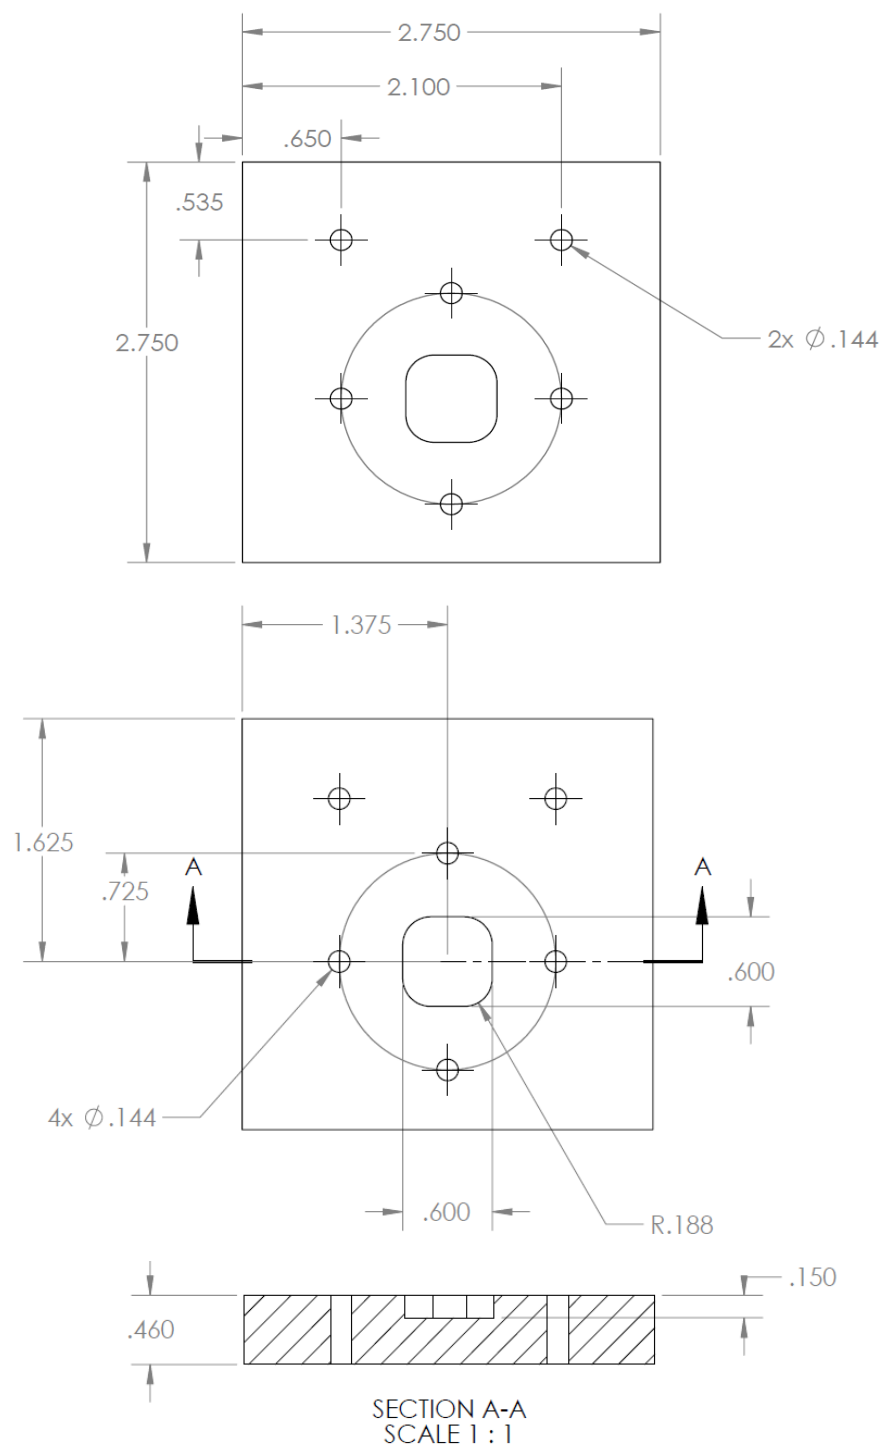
Technical drawings of the insulation block for the 9 × 9 test vehicle; all dimensions in inches unless otherwise specified.
